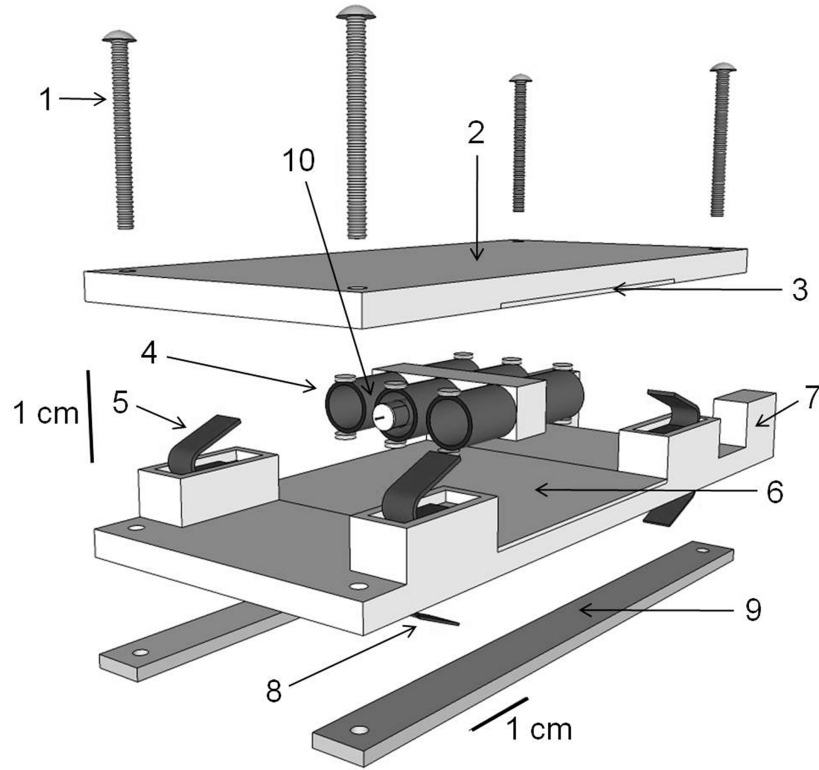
STM Assembly: 1) stainless steel screws, 2) top Macor piece, 3) top alumina plate, 4) walker assembly, 5) stiff springs, 6) bottom alumina plate, 7) bottom Macor piece, 8) soft springs, 9) stainless steel bars and 10) scanner with tip.
